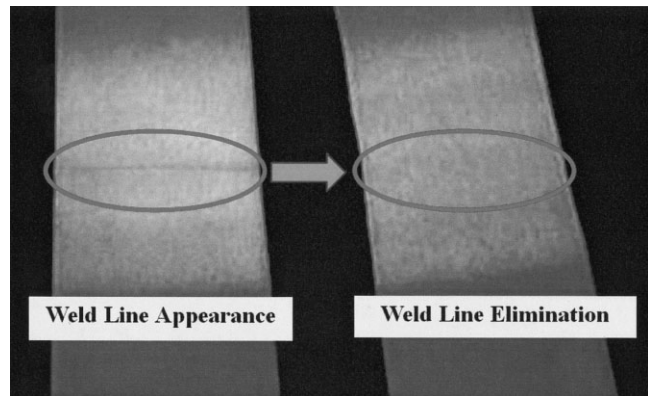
Surface mark of weld line without induction heating (left). Weld line mark was eliminated (right) via induction heating prior to melt injection.
